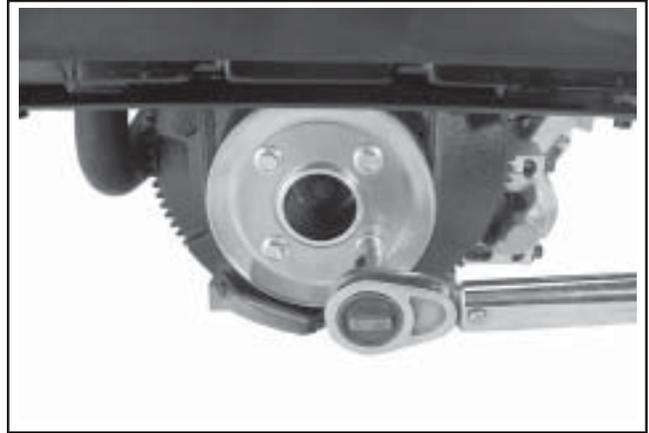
Torquing Lower Pulley Mounting Screws.
